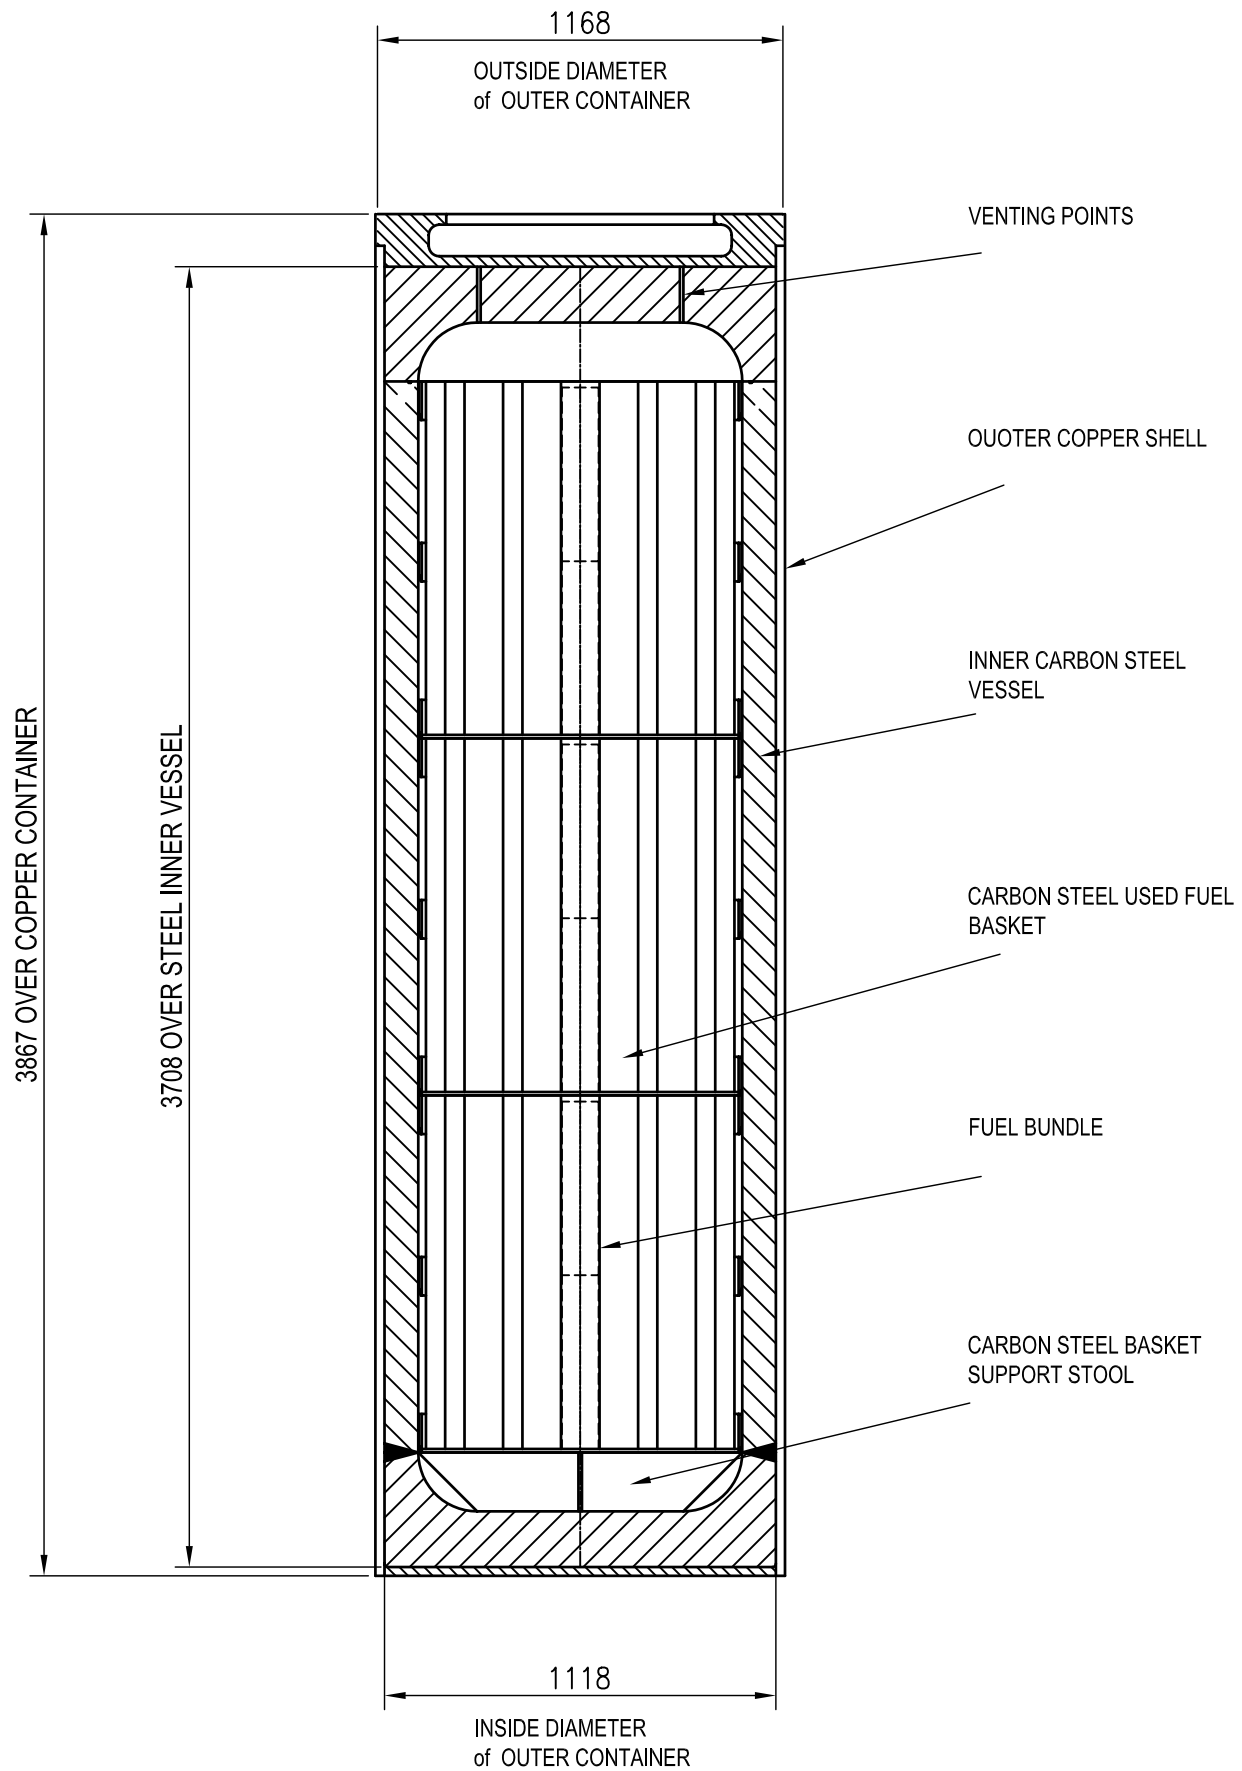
ASSEMBLY OF USED FUEL BASKETS AND CONTAINER
